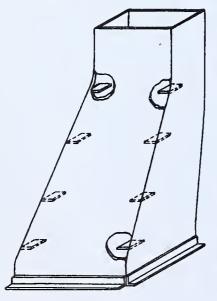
Short Flat Bars Welded to Plates
